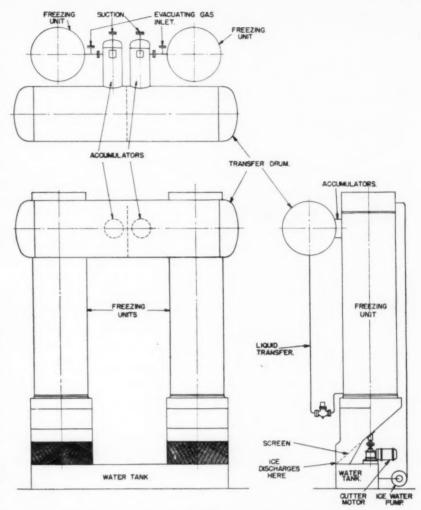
AUTOMATIC TUBE-ICE MACHINE, SHOWING SHELL-TO-TRANSFER-DRUM
